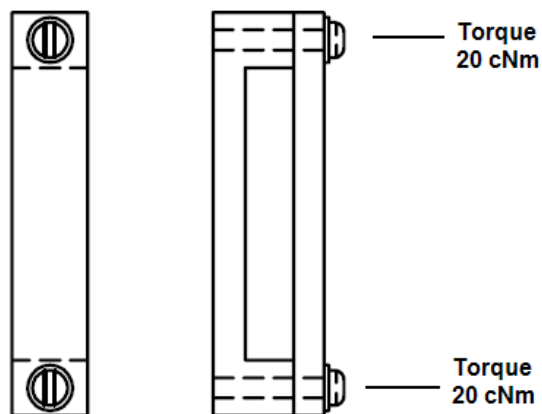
Figure II : A drawing of the clamp around the upper part of the flame gap. The clamp is installed to achieve a uniform flame gap opening. The two screws are fastened with a torque of 20 cNm.
